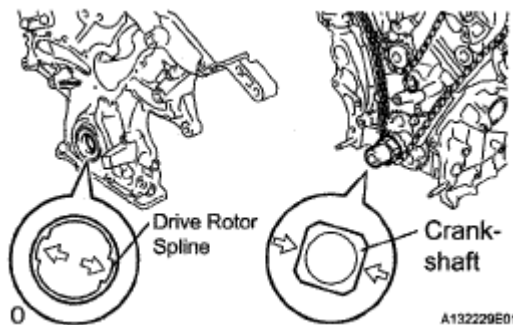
Aligning Oil Pump's Drive Rotor Spline And Crankshaft
